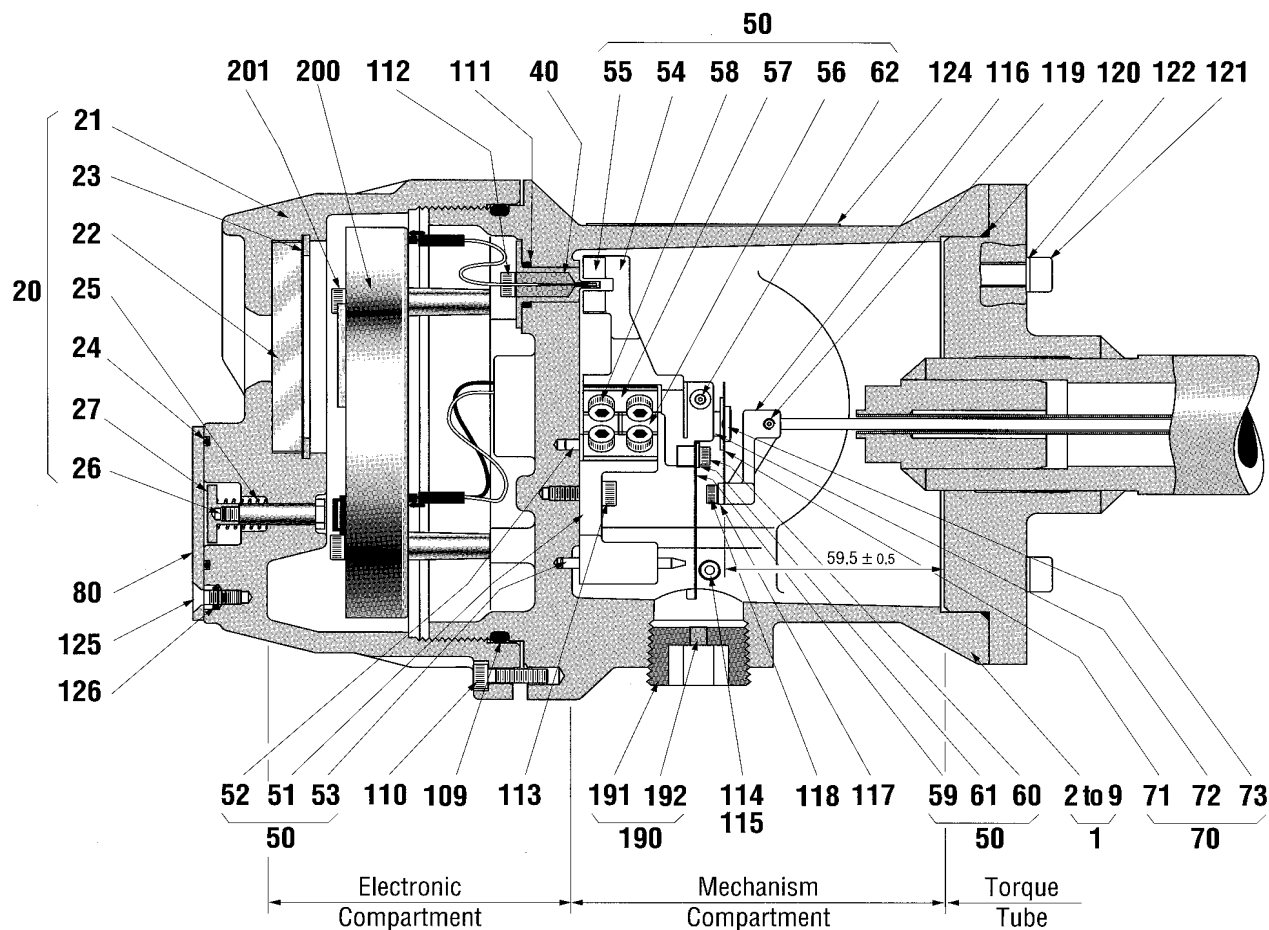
Cross Section of Type 12300 Electronic Level Transmitter
